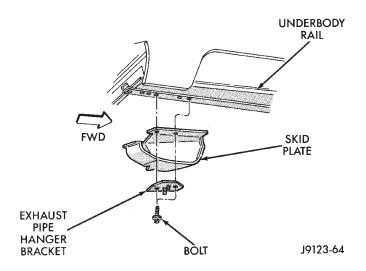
Fuel Tank Skid Plate W/O Trailer Hitch Or Tow Hook
